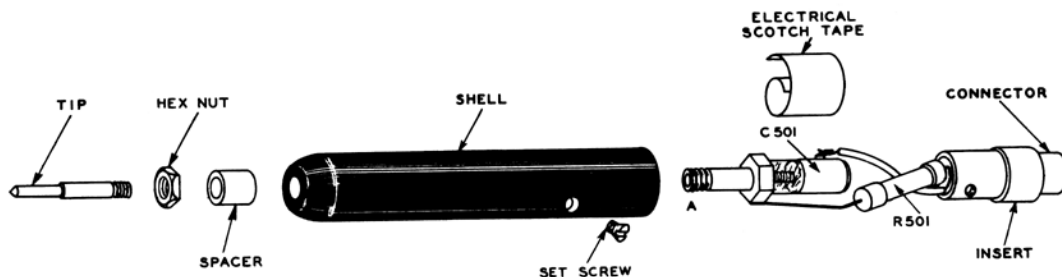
Exploded View of WG-216B Low-Capacitance Probe
